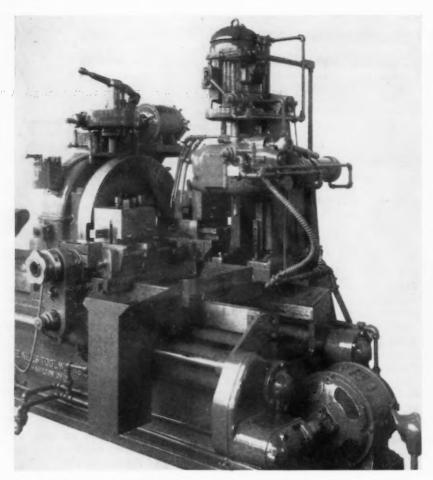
Close-up of right-hand carriage on centering and cutting-off machine. Centering head, front and rear tool holders, and chucking mechanism are shown.
